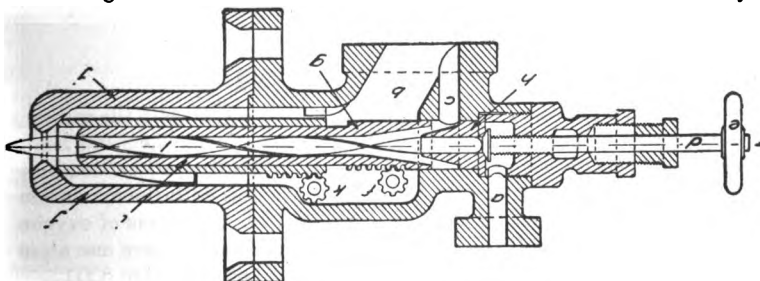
Air-jet burner. *a*, Oil inlet; *b*, air inlet; *c*, auxiliary air inlet; *d*, valve spindle for regulating oil feed; *e*, valve wheel; *f*, pinion for adjusting inner tube; *g*, hollow cone around which steam passes; *h*, oil cone; *i*, air cone; *j*, casing; *k*, pinion for adjusting outer tube; *l*, spiral guide.
